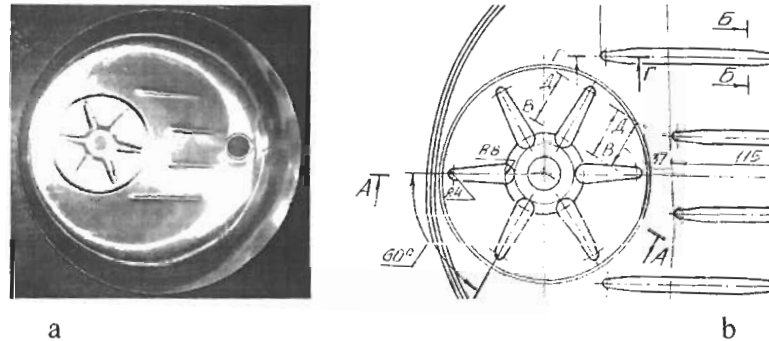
The bottom of the washing machine "Donbas" (a) and a fragment of its drawing (b)
